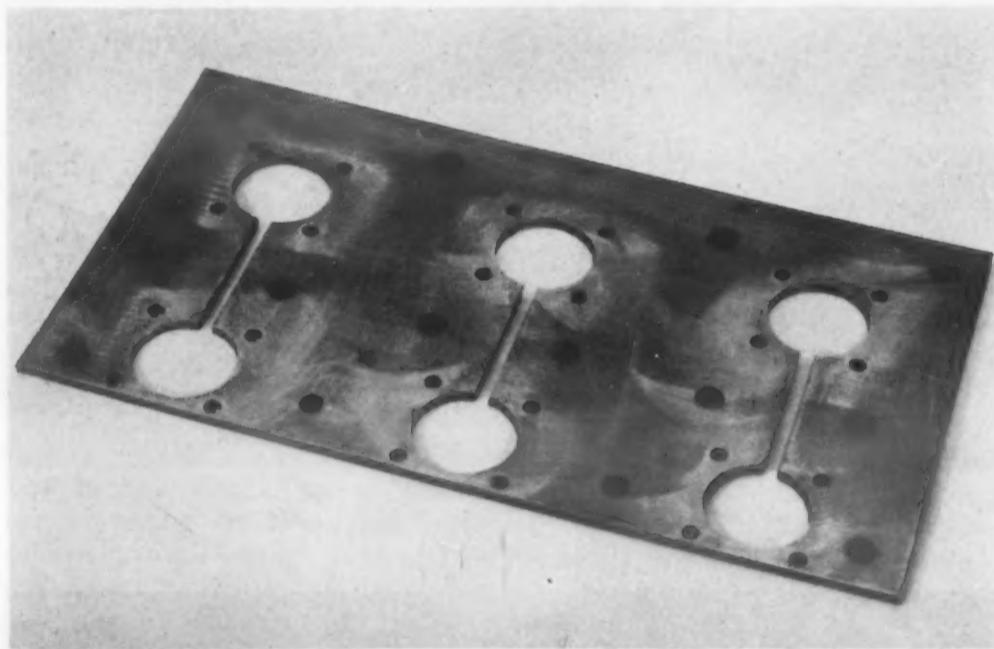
The difficulty of cutting or burning holes in a $\frac{3}{8}$ -in. piece of steel was overcome by spot welding together two $\frac{3}{16}$ -in. thickness of mild steel, which were previously punched with standard tools.
